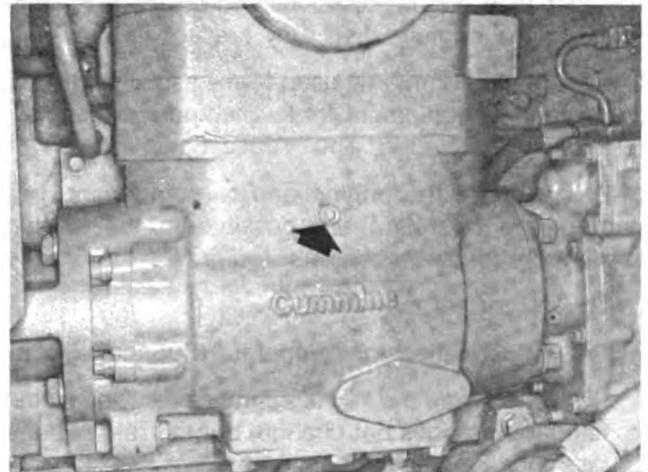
, (K21904). Two cylinder air compressor coolant drain
